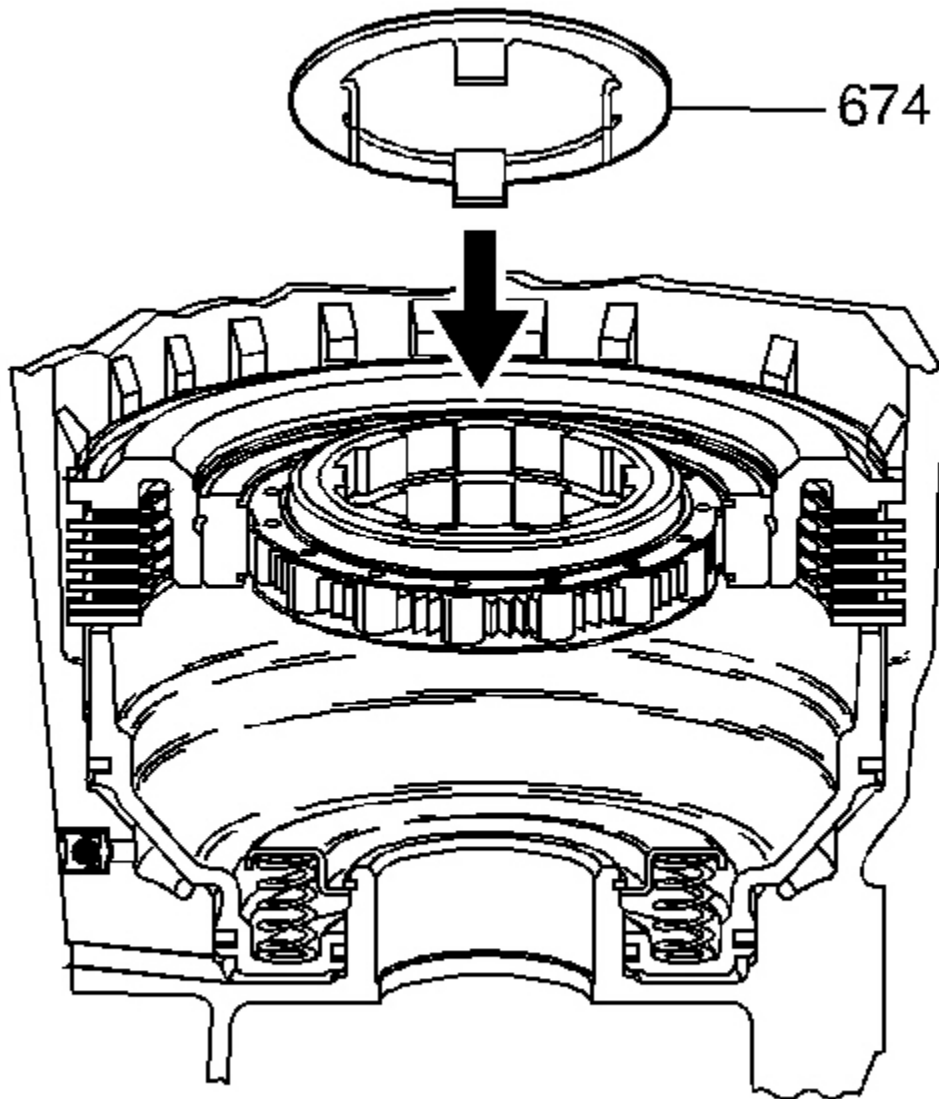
Aligning Thrust Washer Tangs With Low And Reverse Roller Clutch Race Splines
